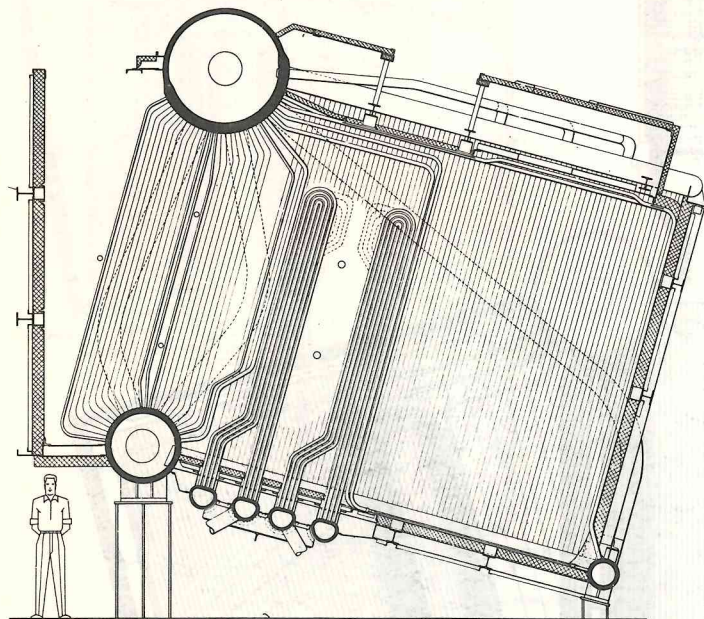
V2M-8 divided furnace reheat boiler (Combustion Engineering)
